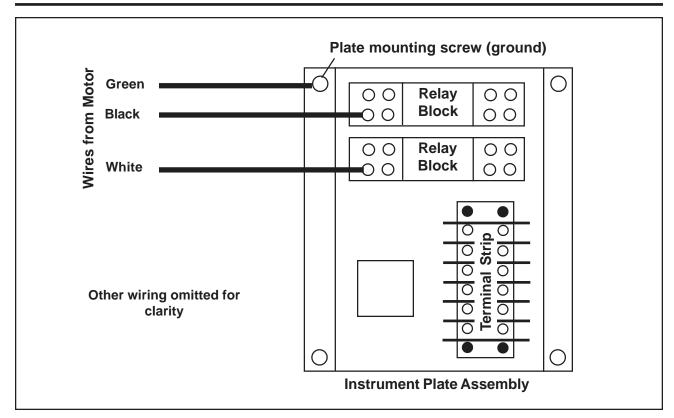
Motor Wire Connections to the Instrument Plate Assembly
